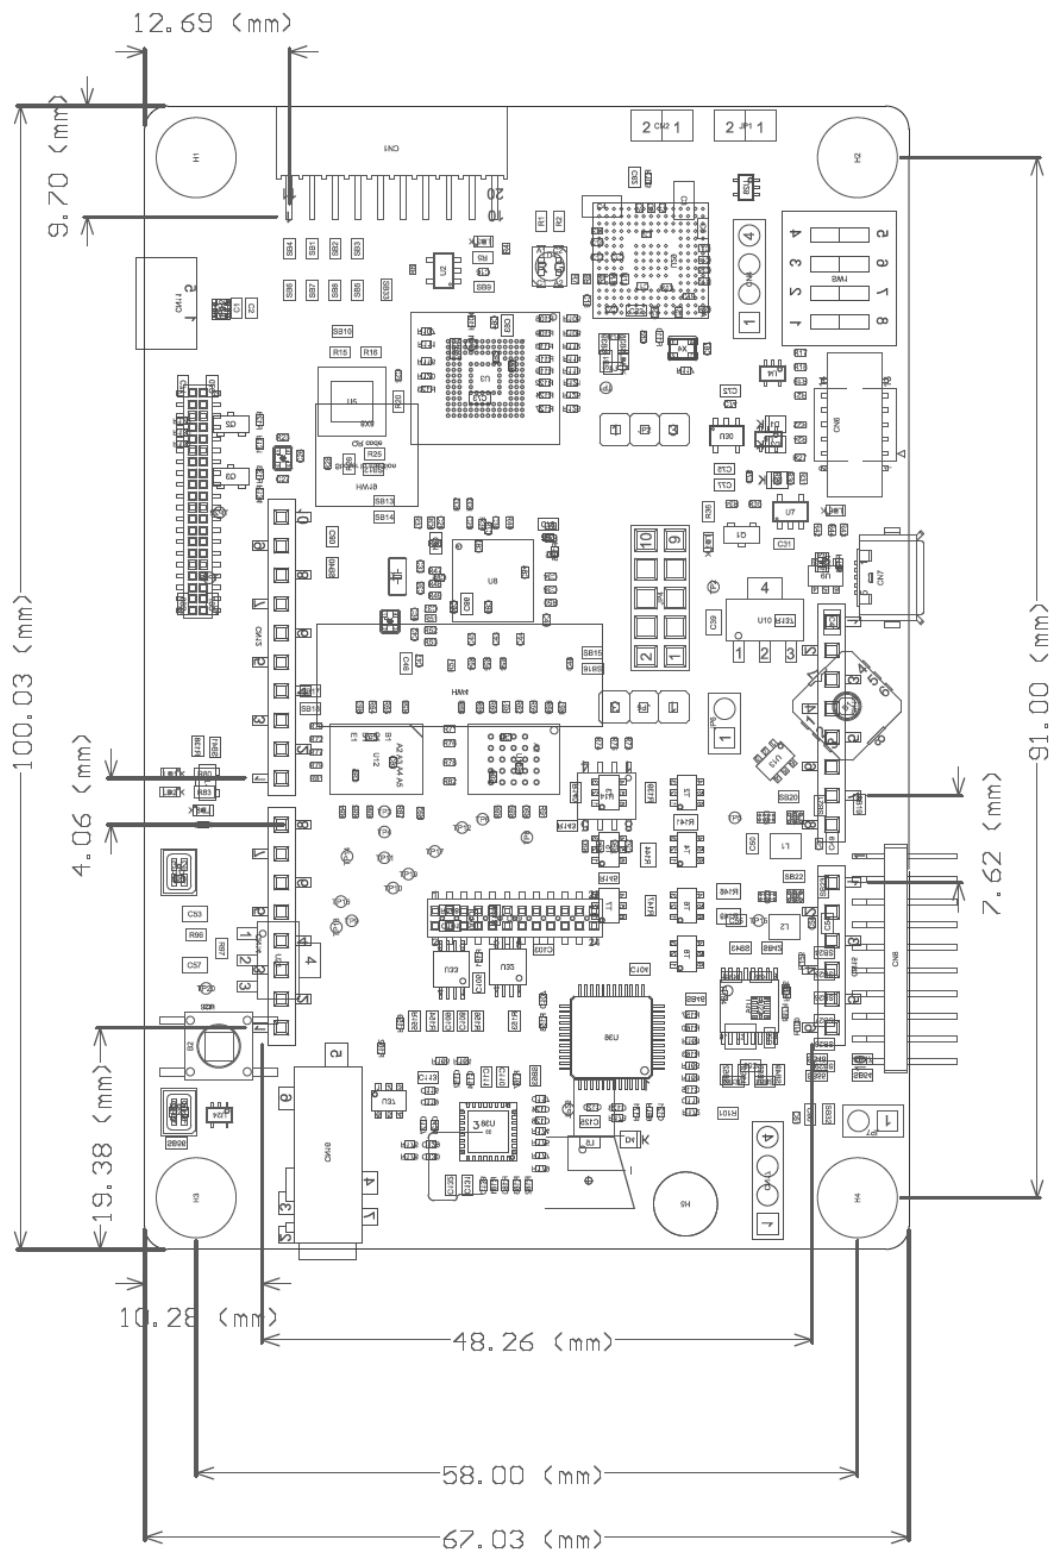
STM32L4P5G-DK PCB layout (bottom view)
